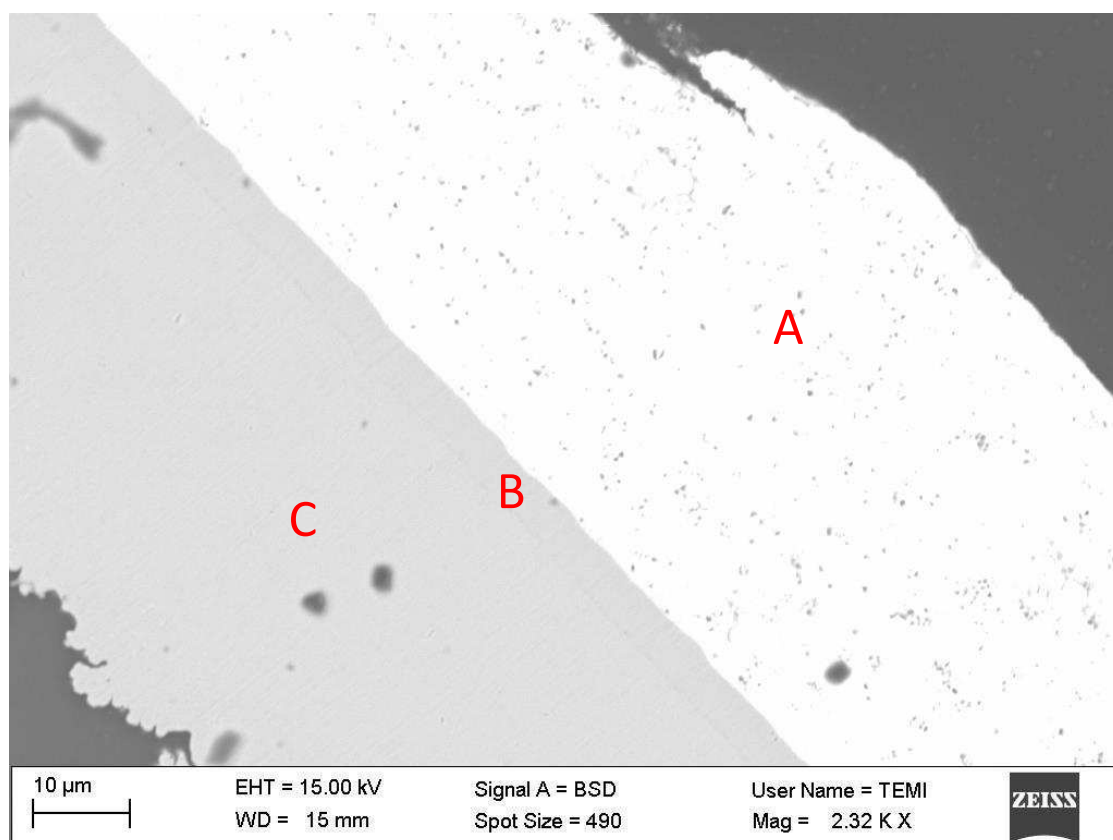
PCB Cross Sectional Micrographs, Showing Tin-Lead Solder (A), Nickel Coating (B), and Copper (C)
